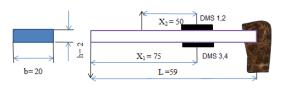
Dimensions of the gripping rod (strain on steel rod).
